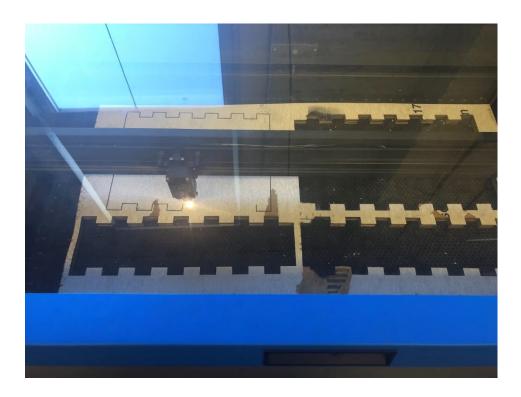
Carbon dioxide laser cutter being used to cut sides out for ball counting ramp in Washburn Shops.
